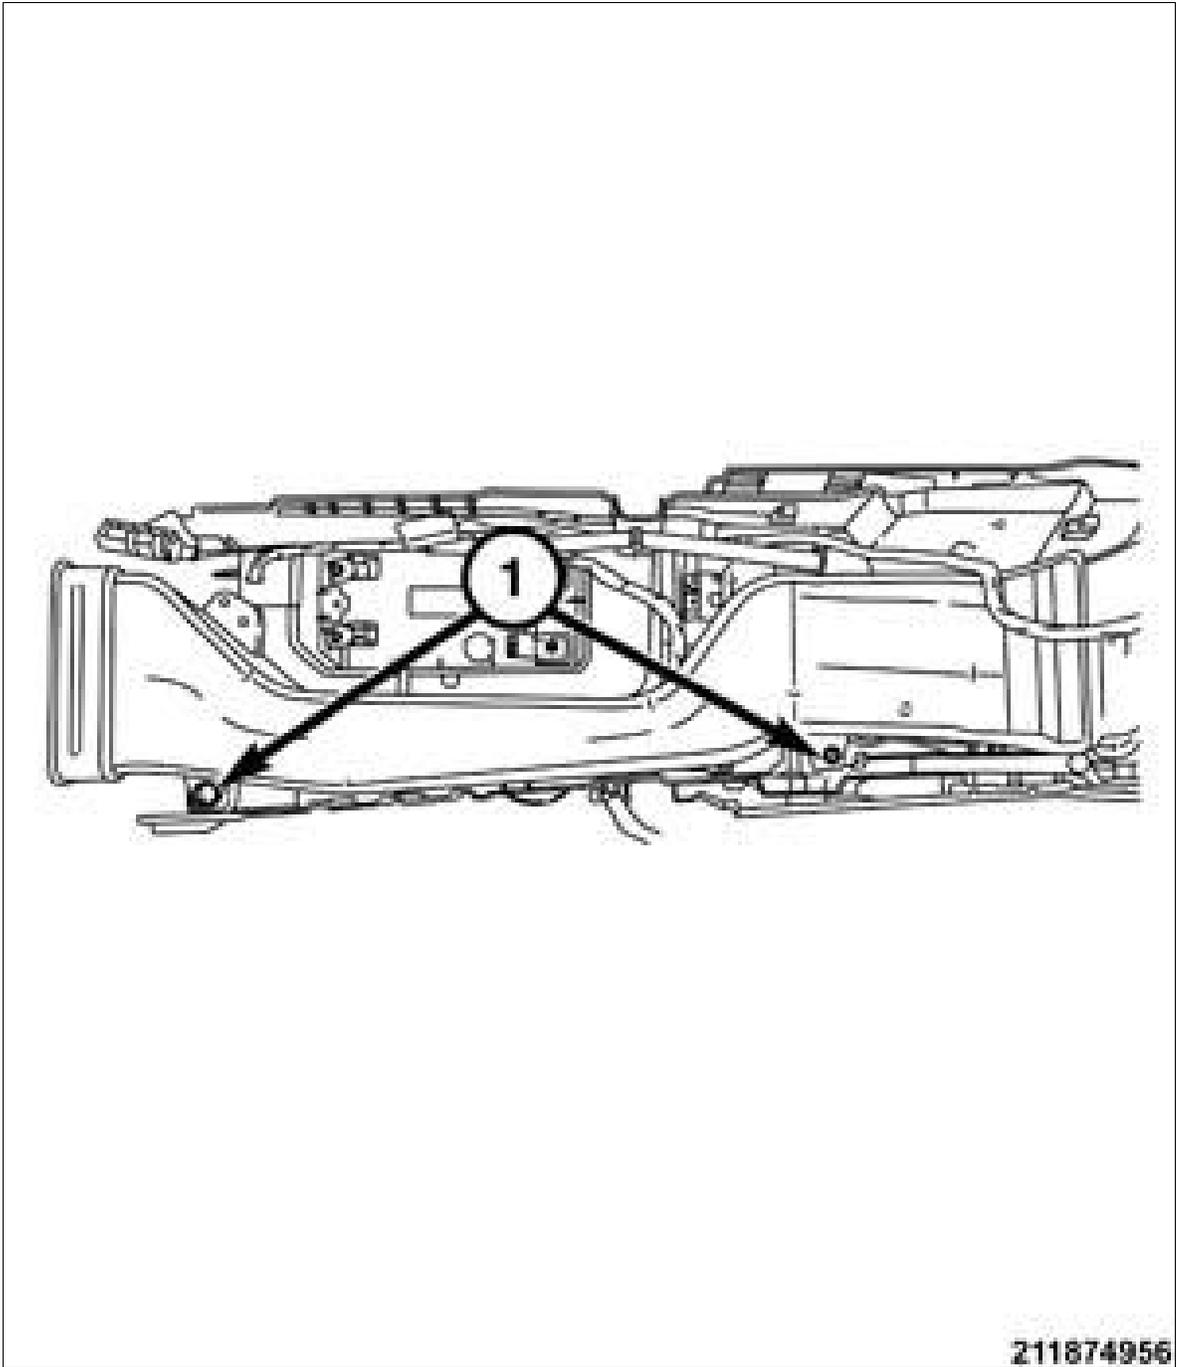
Removing/Installing Center Console Lid With 3 Mounting Screws
